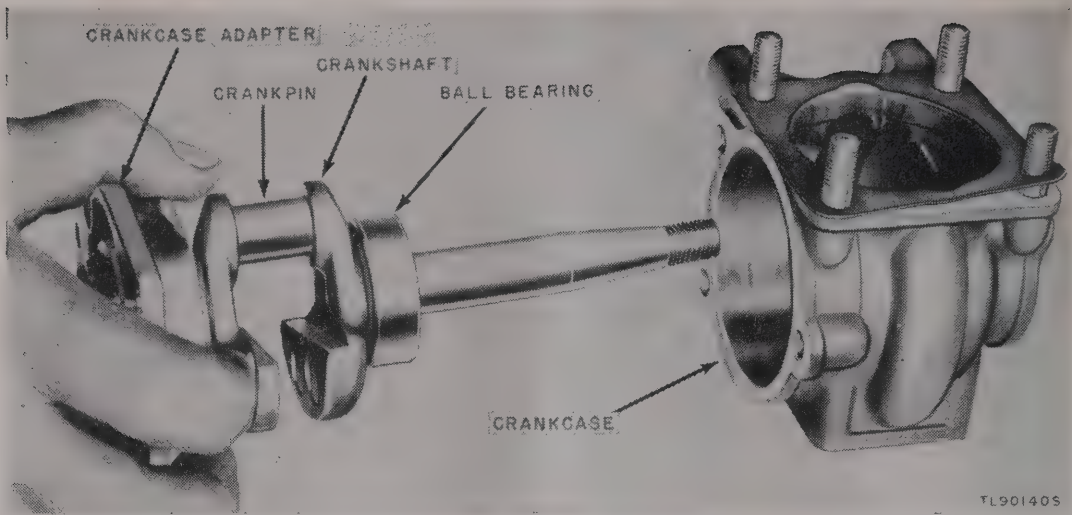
Crankcase bearings and crankcase adapter removed from crankcase.
